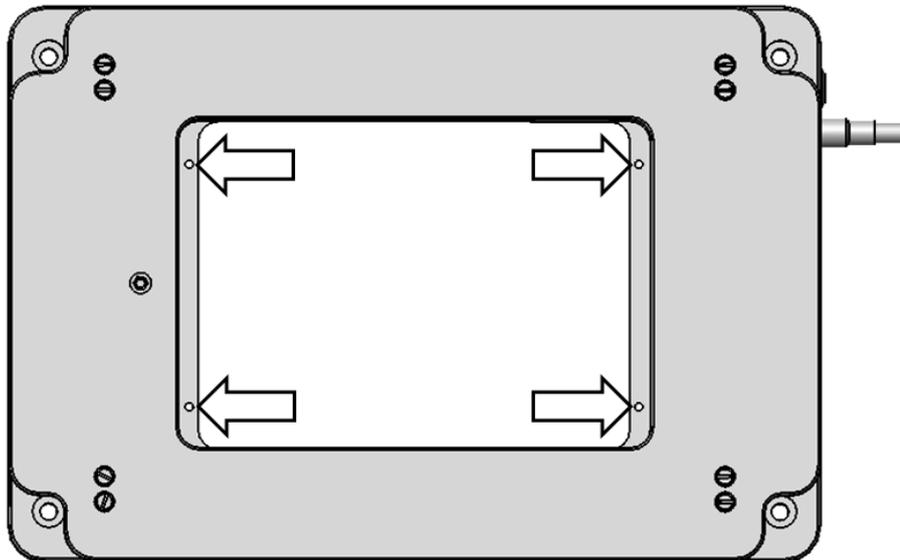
M2 threaded holes in the sample holder mounting plane (p. 9) of the motion platform
